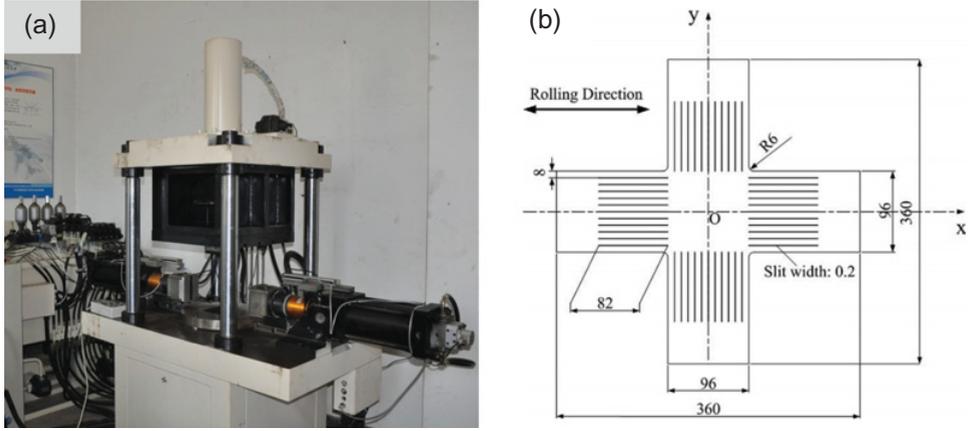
(a) The biaxial tensile testing apparatus; (b) geometry of the cruciform specimen (dimensions in mm).
